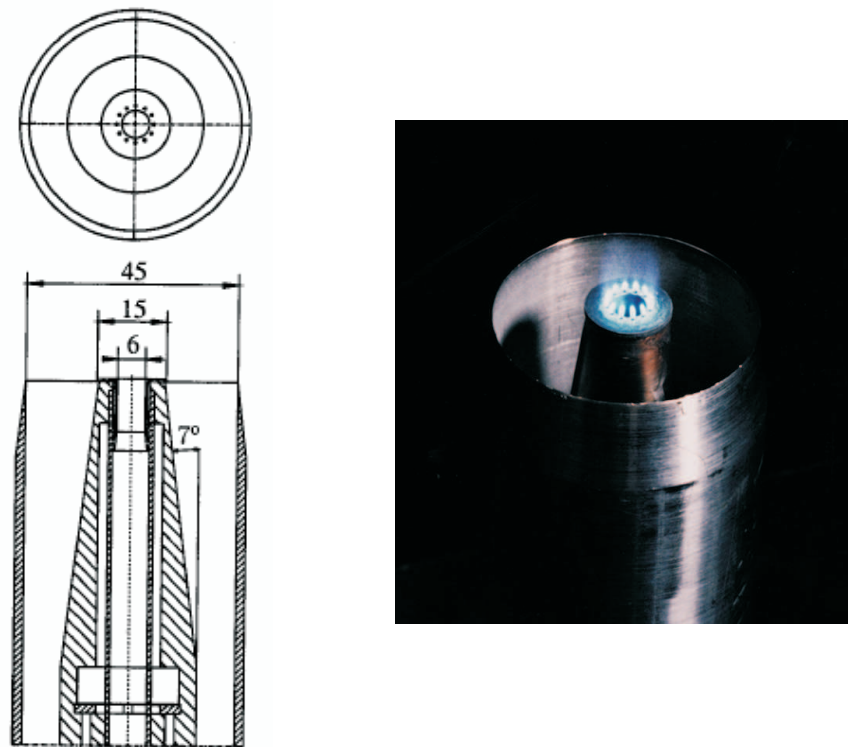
Left: Top and side view of the burner head. Dimensions in mm
